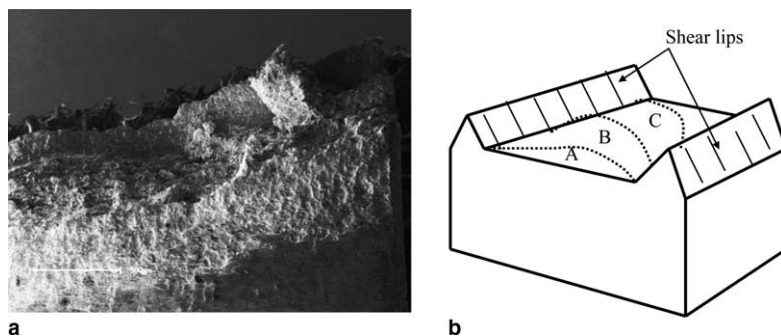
Fracture progress in a finite sheet: (a) Fracture surface of fuel plate; (b) schematic of crack growth. A, B and C represent the progressive crack growth through the sheet.
